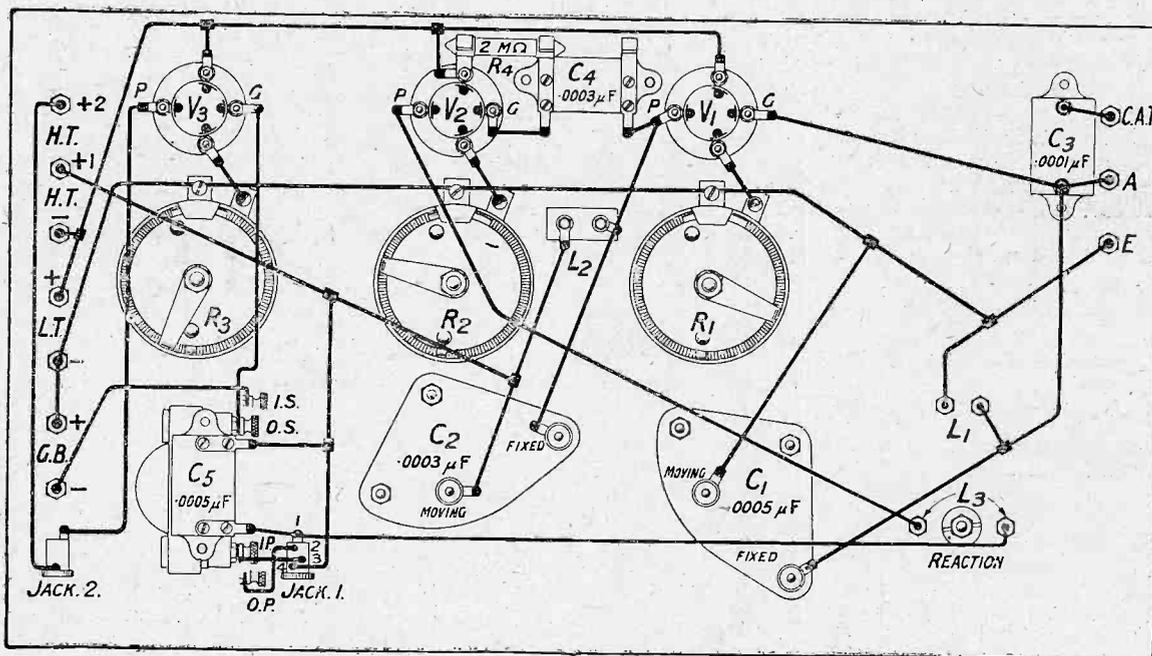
The wiring diagram, Blue Print No 107b. Jack No. 1, is for the purpose of cutting out the L.F. stage.
